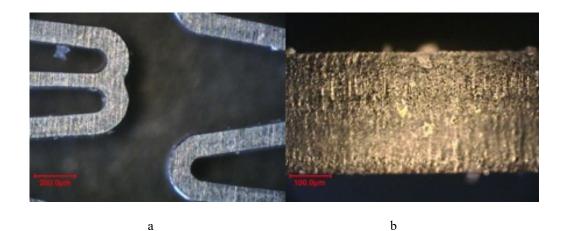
Stainless steel sheet cut sample (a) top view (b) side view.
